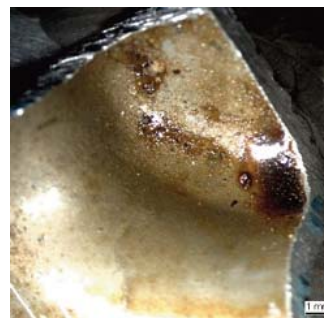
shows the cross section of the carb cut through the primary drillings. Tar can be seen as a golden colour deposit.
